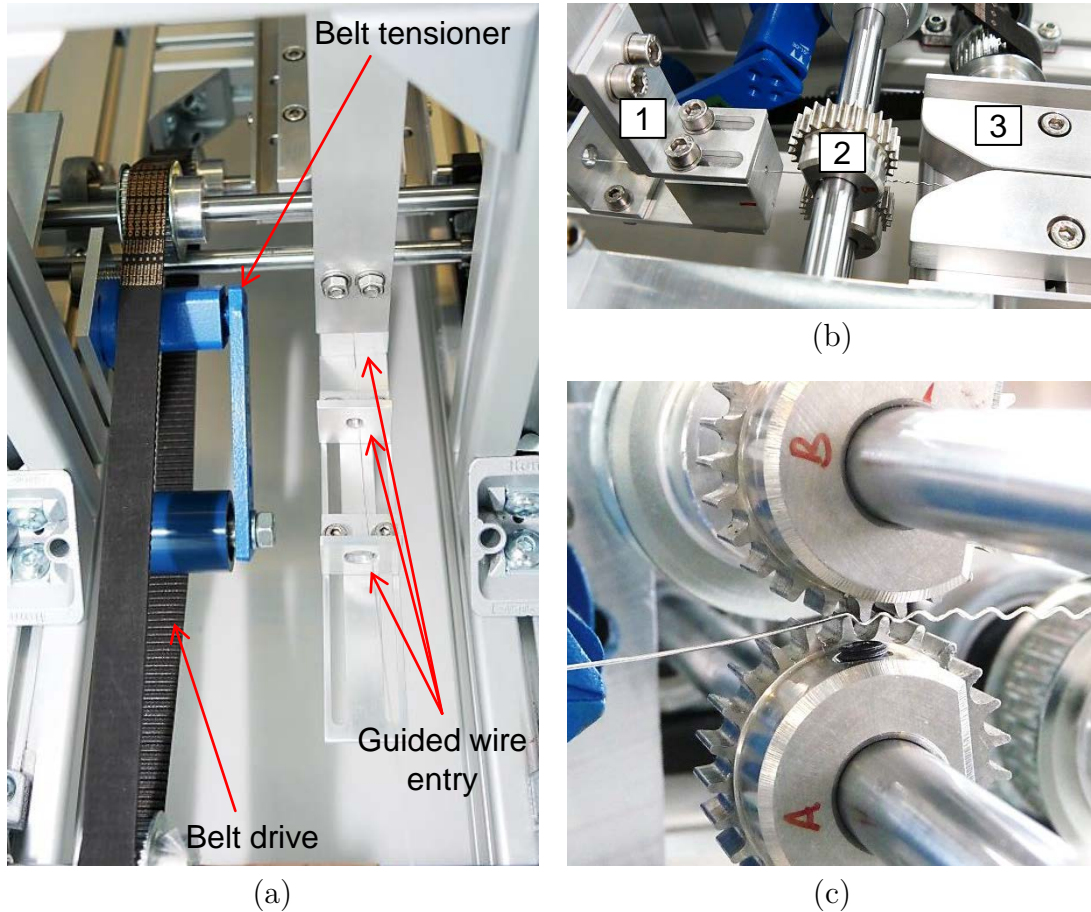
Details of Machine 3 showing (a) the belt drive to move both toothed wheels simultaneously and inversely, as well as the wire guidance before the shaping process, (b) a top view on the wire guidance inlet (1), the toothed wheels (2), and the guided wire outlet (3), and (c) a wire interconnector that is shaped between two optimized toothed wheels.
